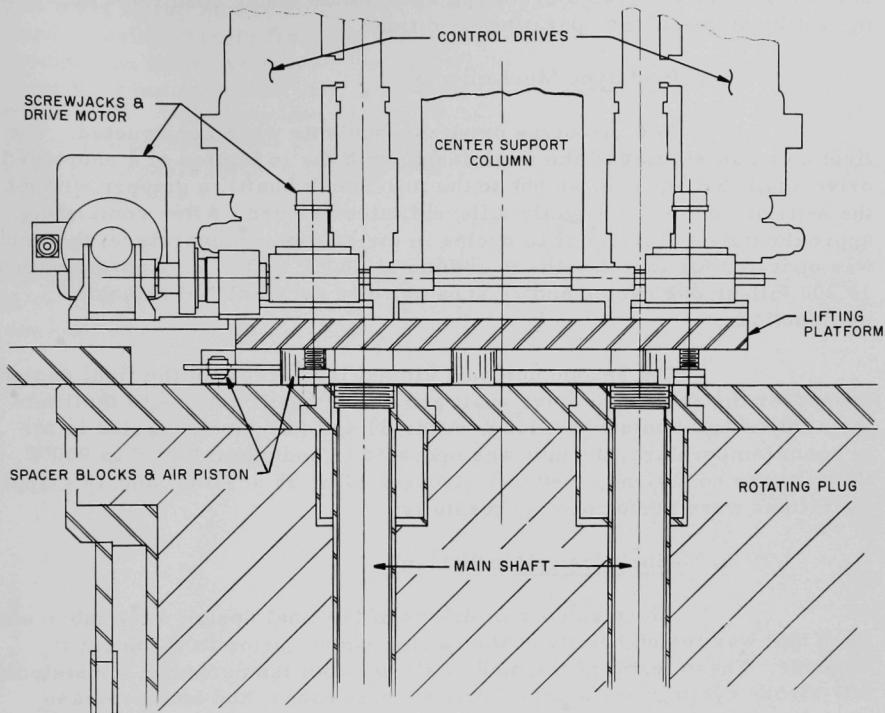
Lifting Platform-Spacer Block Drive Assembly
